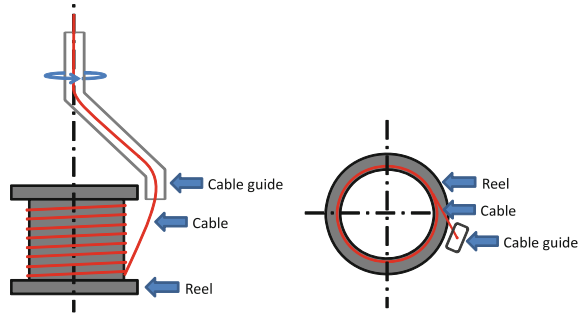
Cable rewinding module on the reel. The module is driven by a motor located inside the reel. As it rotates around the reel, the cable guide swings up and down to evenly wind the cable
